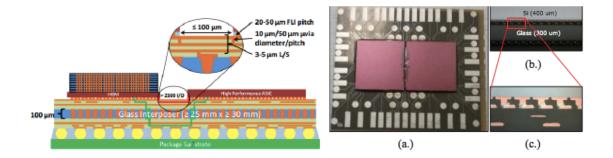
2.5D FLI assembly at 100 μ m die-to-die spacing (a.) top view of 25 mm x 30 mm six-metal-layer glass interposer (b) cross-section (c) FLI detailed cross-section.
